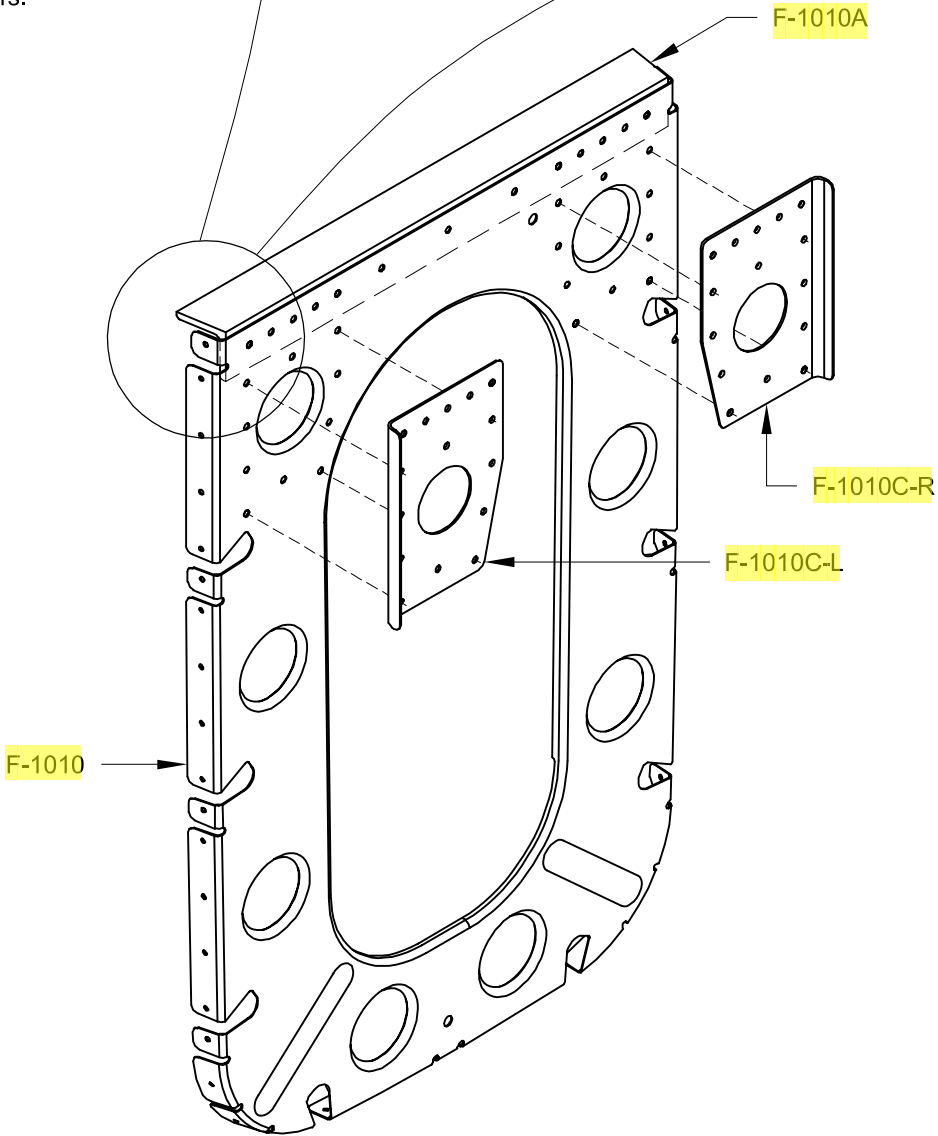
DRILLING THE HORIZONTAL STABILIZER ATTACHMENT ANGLE
